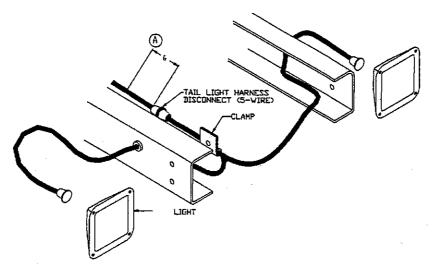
RE-INSTALL REAR WIRING HARNESS
